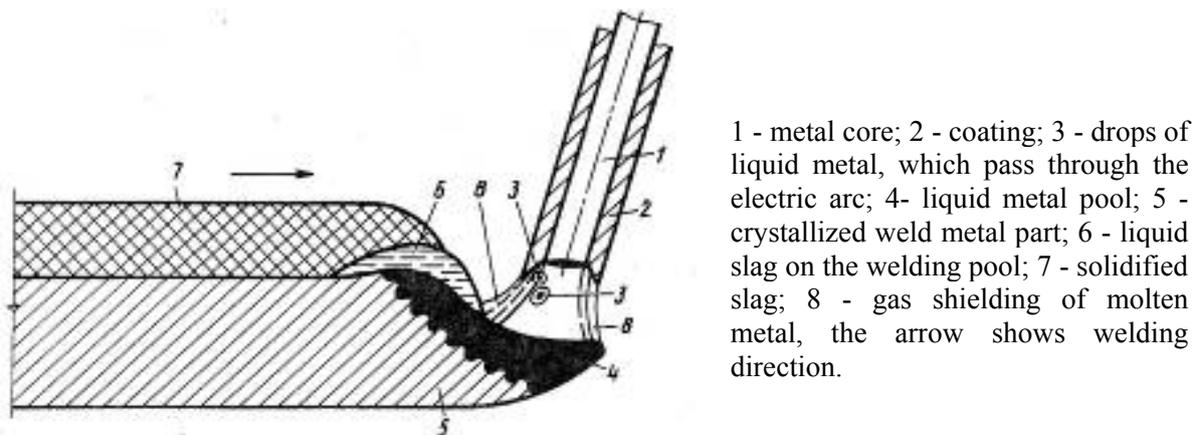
Scheme of welding with a coated electrode (cross-section) with a core of solid rod [1].
